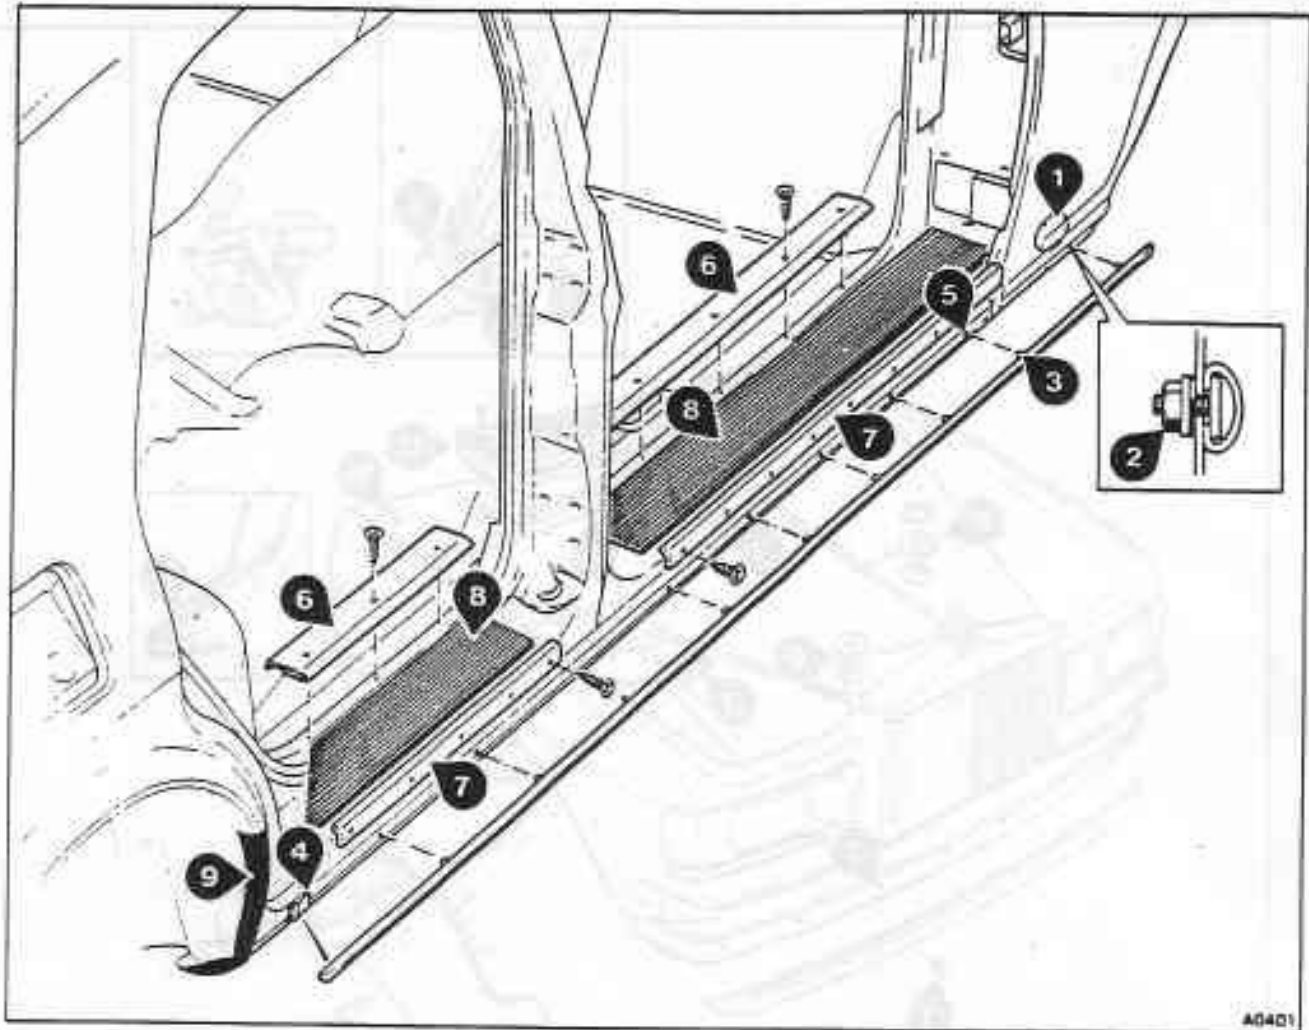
Sill mouldings, treadrubbers, and rear wheel-arch stoneguards
